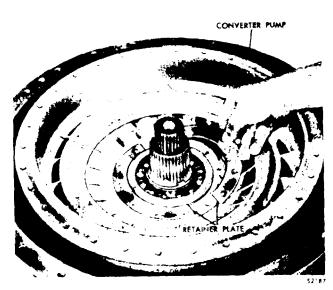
C-14. Removing (or Installing) Split Retainer Plate
